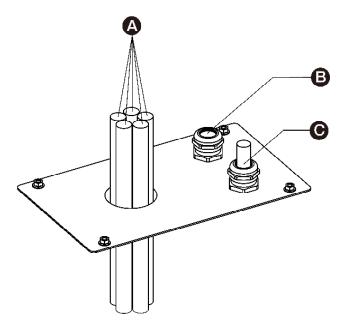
Guiding the Cables through the Cable Gland Plate
